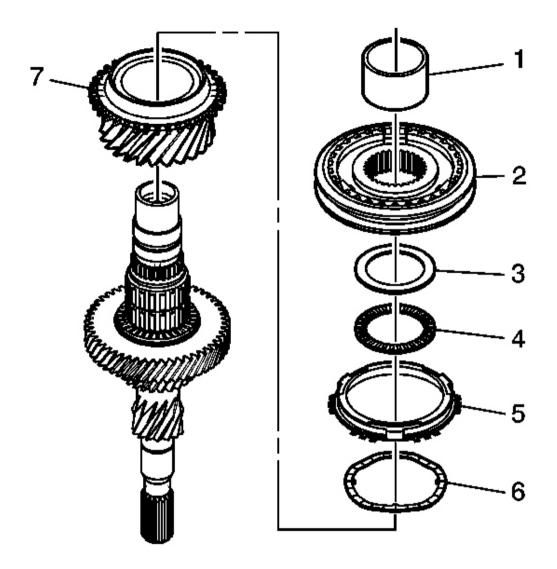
3rd/4th Synchronizer, Bearing Collar, Washer & Blocking Ring Courtesy of GENERAL MOTORS CORP.
